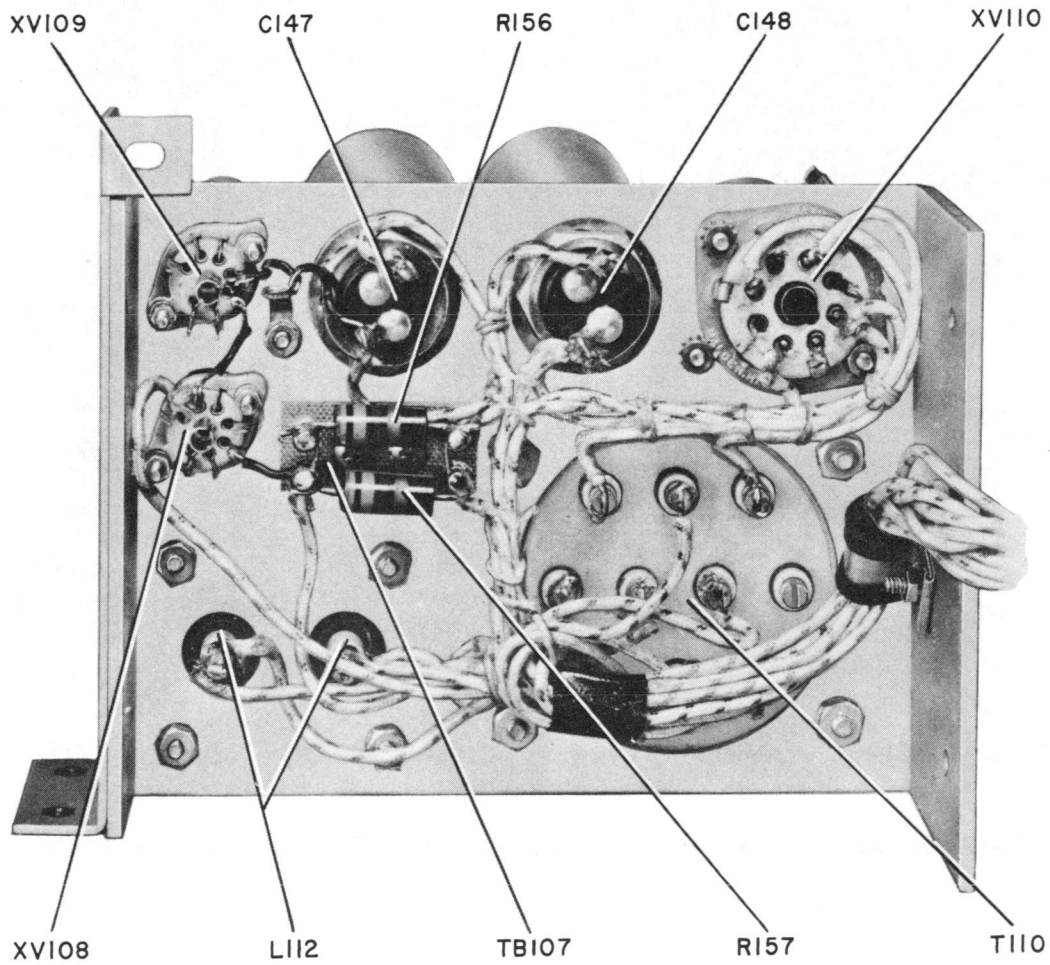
Component Locations, Bottom of Chassis, Power Supply Assembly
